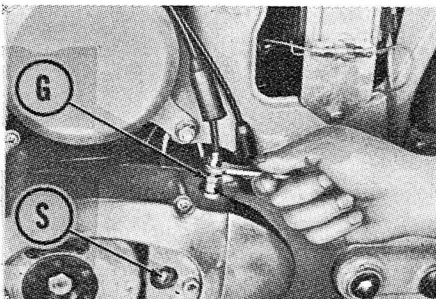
The clutch is adjusted at screw (S) and cable guide (G). Refer to text for procedure.
